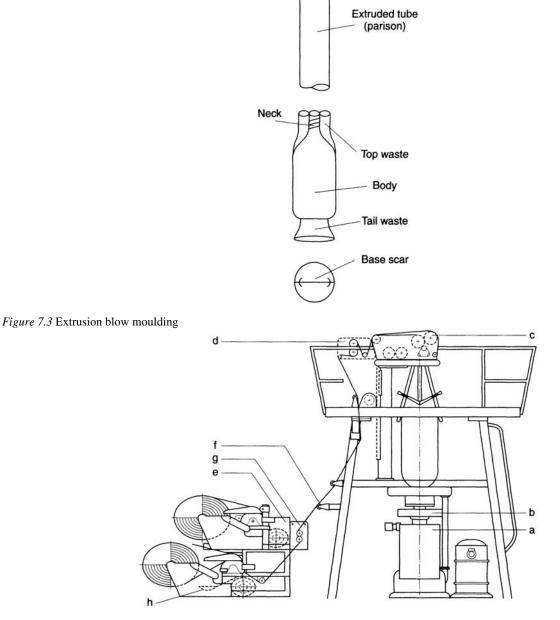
Tubular film apparatus: (a) extruder; (b) rotating blown film die; (c) haul-off unit; (d) pretreatment unit; (e) wind-up unit; (f) edge trimmer; (g) longitudinal cutter; (h) transverse cutter
